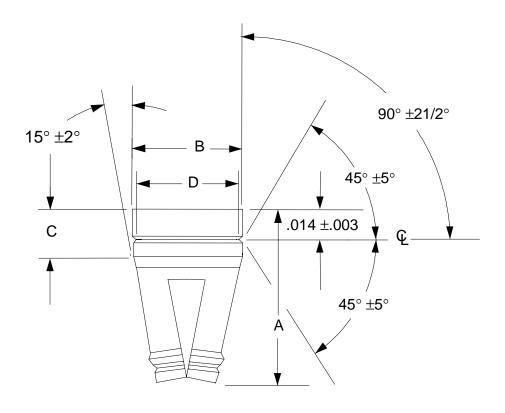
Socket, lead, (type VI solderless spring contact).
